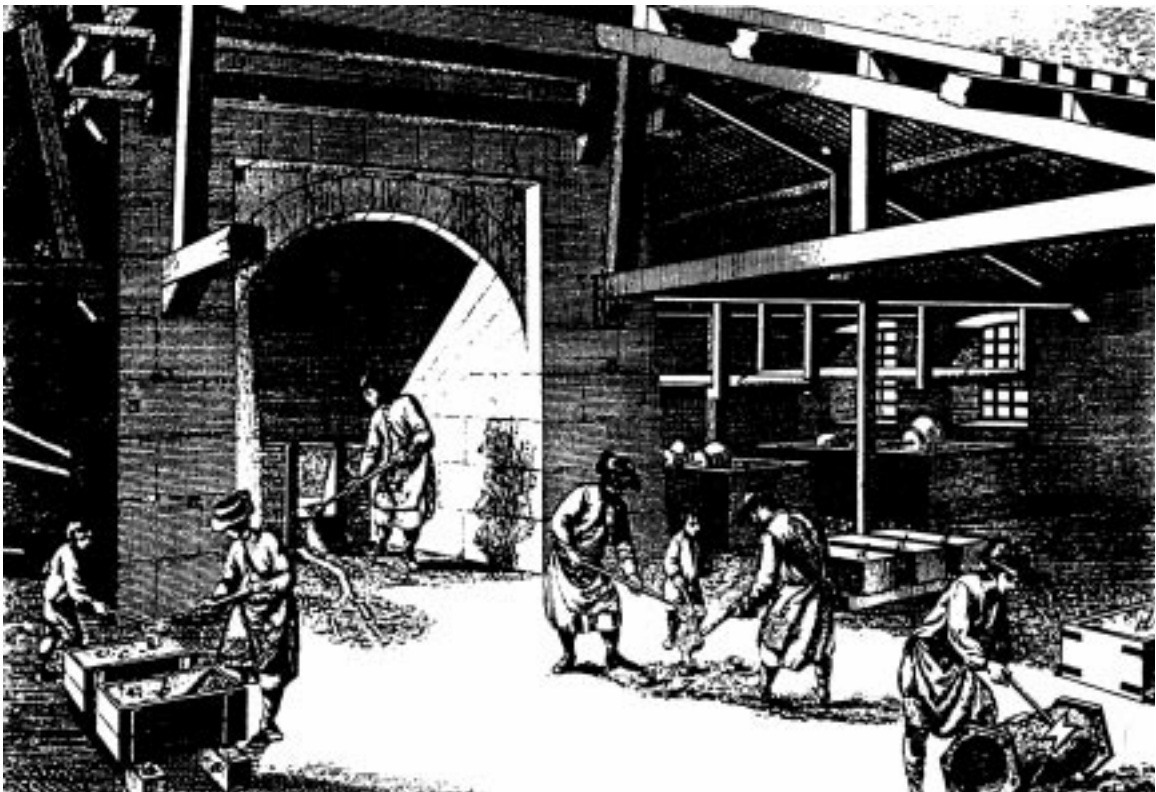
Producing iron castings from a blast furnace in the 1600s.
